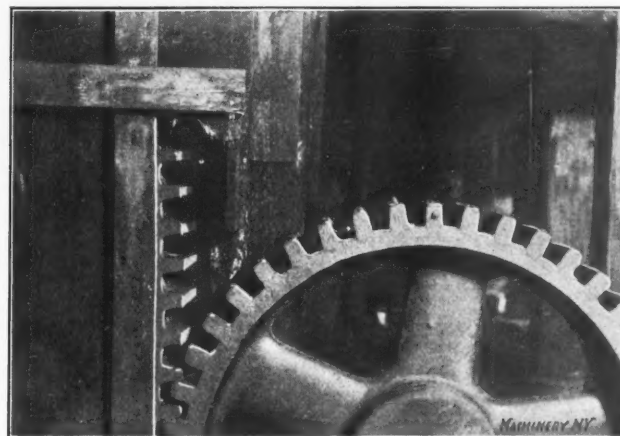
Section of the Driving Gear, and "Jack" Gear with which it meshed
